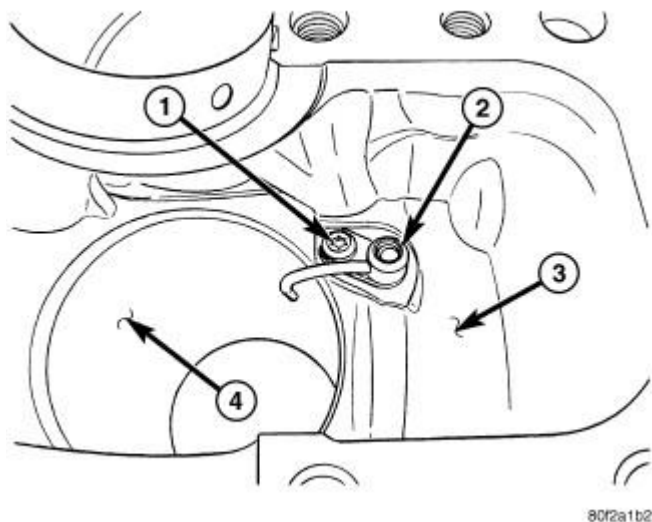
Oil Jet Fastener - 2.4L Turbo
